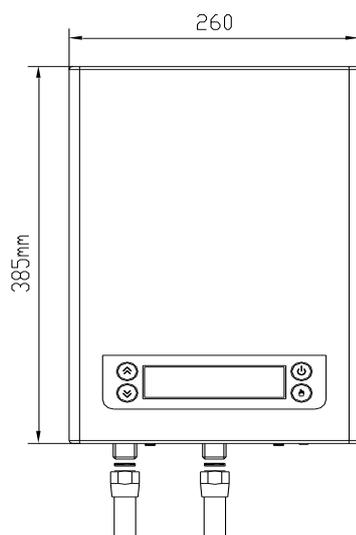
→ Connect the water pipe to the water inlet and water outlet connections, please remember to install the rubber seal ring.
